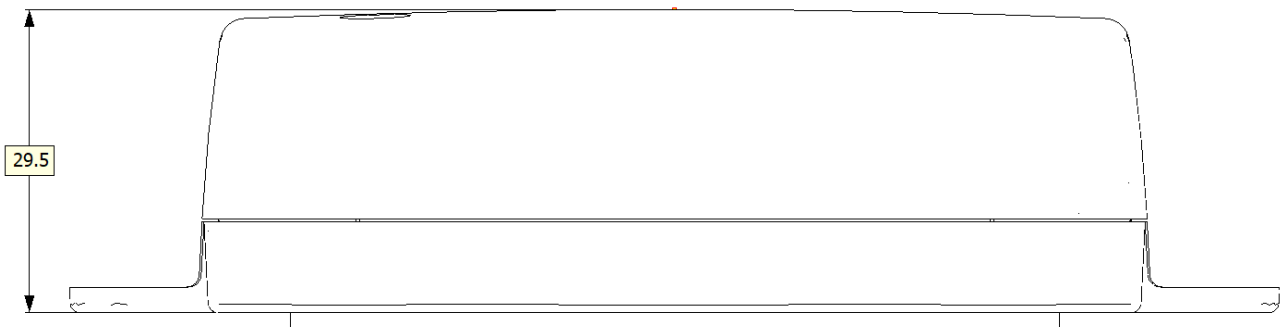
LDSBUS Thermocouple Sensor Adapter Dimension – Side View
